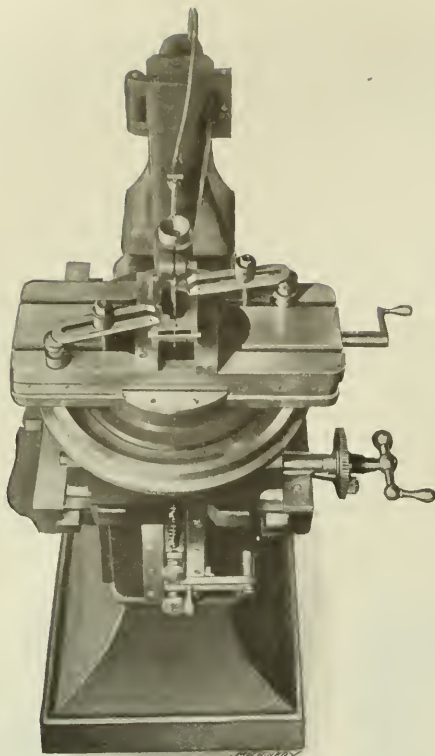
View looking down on Machine, which shows Construction of Universal Table
